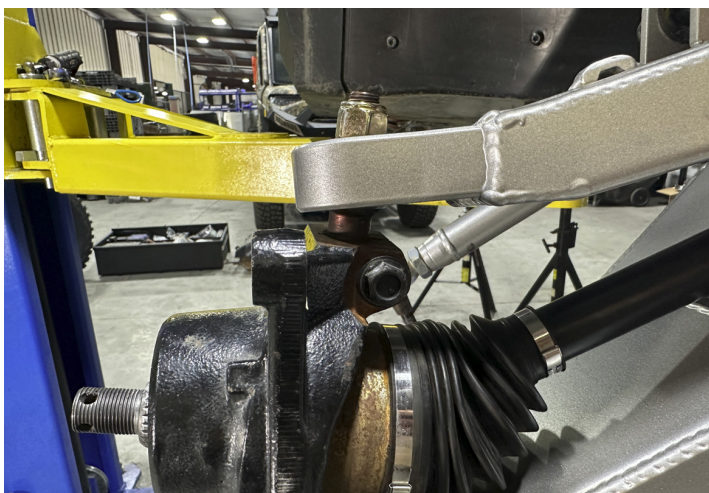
Mount Knuckle to Upper Ball Joint using 15mm Socket and Wrench
